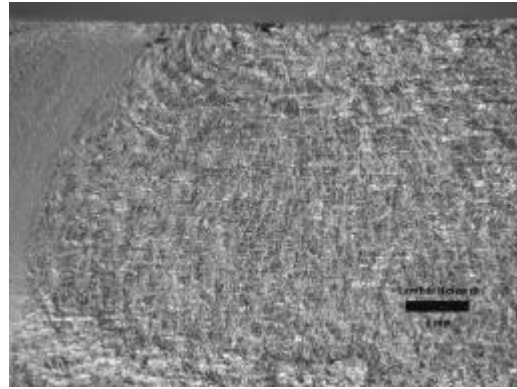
Fracture face showing subsurface initiation in LPB specimen.
